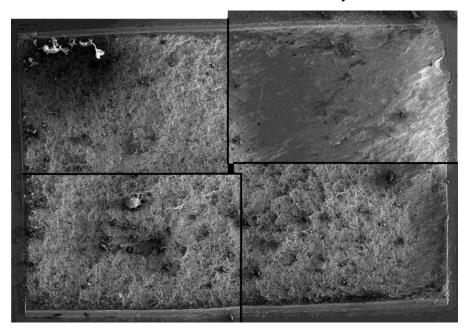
Composite SEM micrograph of incident valve stem fracture surface.
